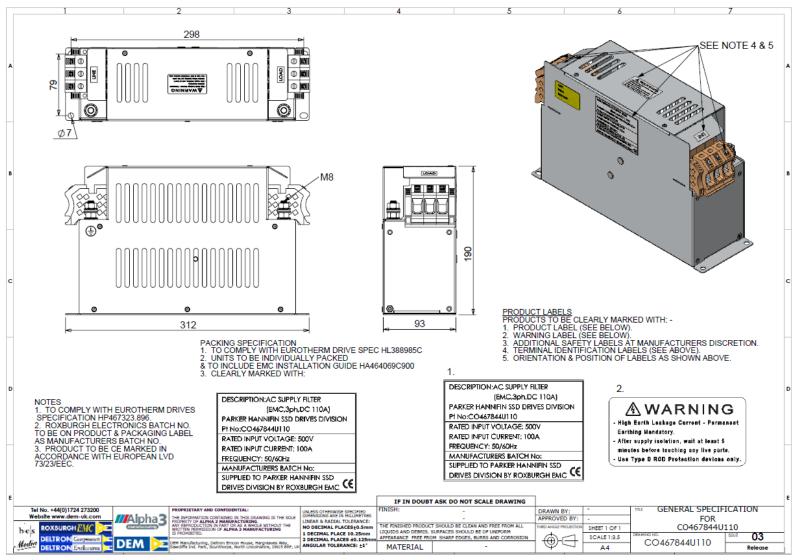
Filter Mounting Details, Part No. CO467844U110 for Frame 2 : 75 & 110 Amp
